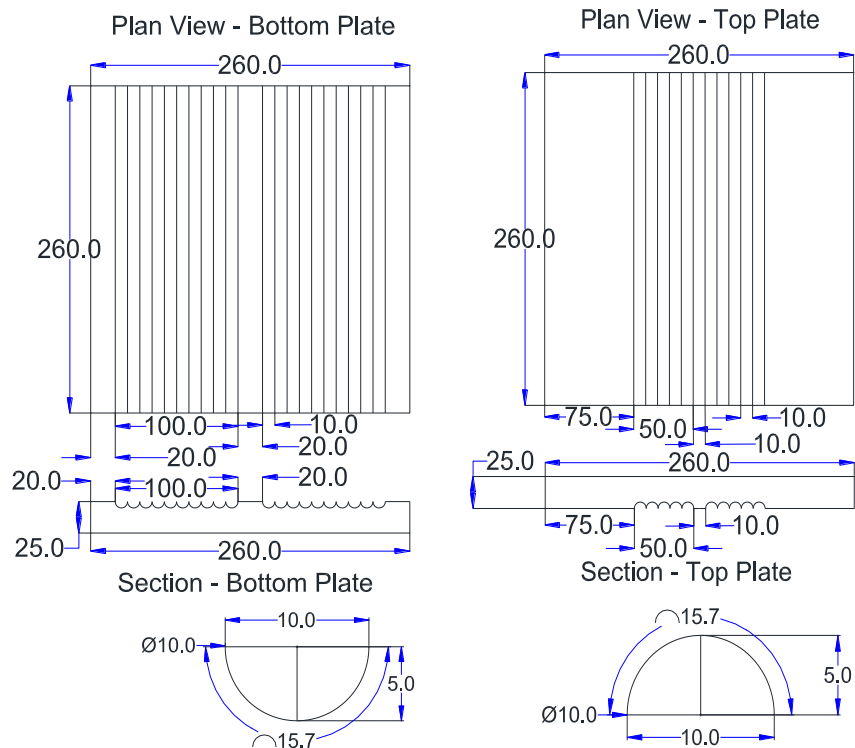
Dimensions of flat ring flexure test plates in mm
